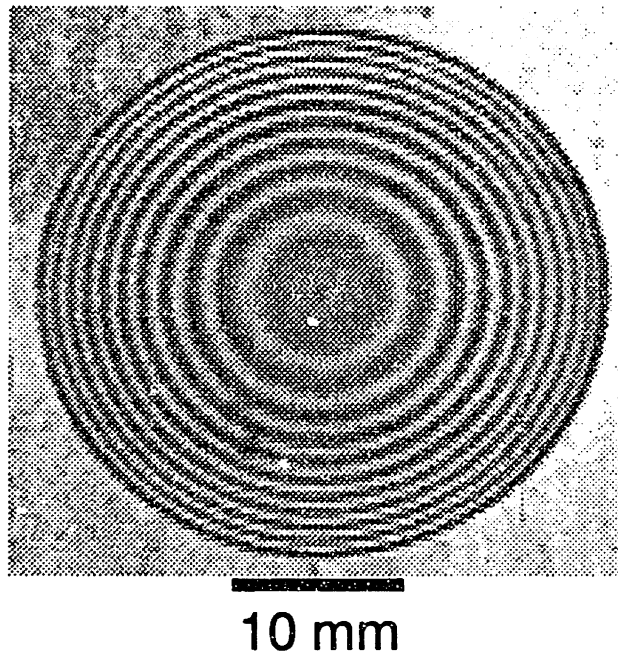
Photograph of moiré fringes of a hemispherical dimple, 16 mm in radius and 2 mm deep, machined in an aluminum plate with a ball-end mill.
